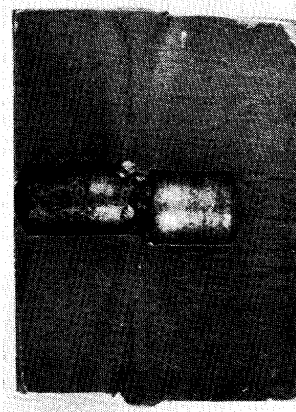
View of E.B. welded specimen with small hole, 150 kv, 11 mA, 1000 mm/min, $a_b^* = 0.95$, 10% porosity
